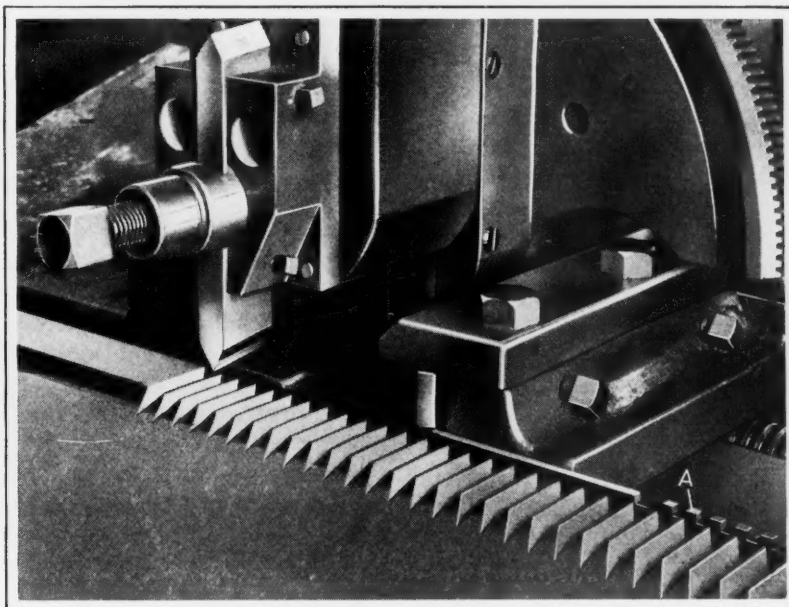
Shaping Teeth on a Scraper Bar to Match the Annular Grooves of a Crusher Roll
